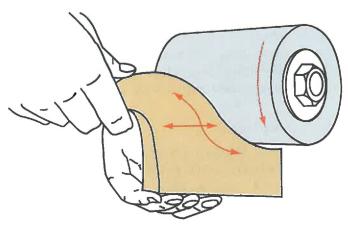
Move workpieces across the arbor mounted drum to obtain good abrasive action and prevent clogging (loading) the abrasive.
